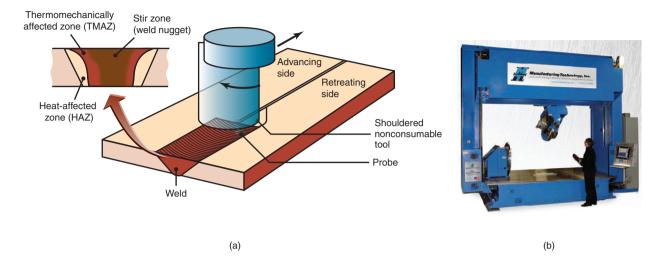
The friction-stir-welding process. (a) Schematic illustration of friction-stir-welding. Aluminumalloy plates up to 75 mm thick have been welded by this process. (b) Multi-axis friction stir welding machine for large workpieces such as aircraft wing and fuselage structures. This machine can develop 67 kN axial forces and welding speeds up to 1.8 m/s. It is powered by a 15 kW spindle motor. *Source:* (b) Courtesy of Manufacturing Technology, Inc.
